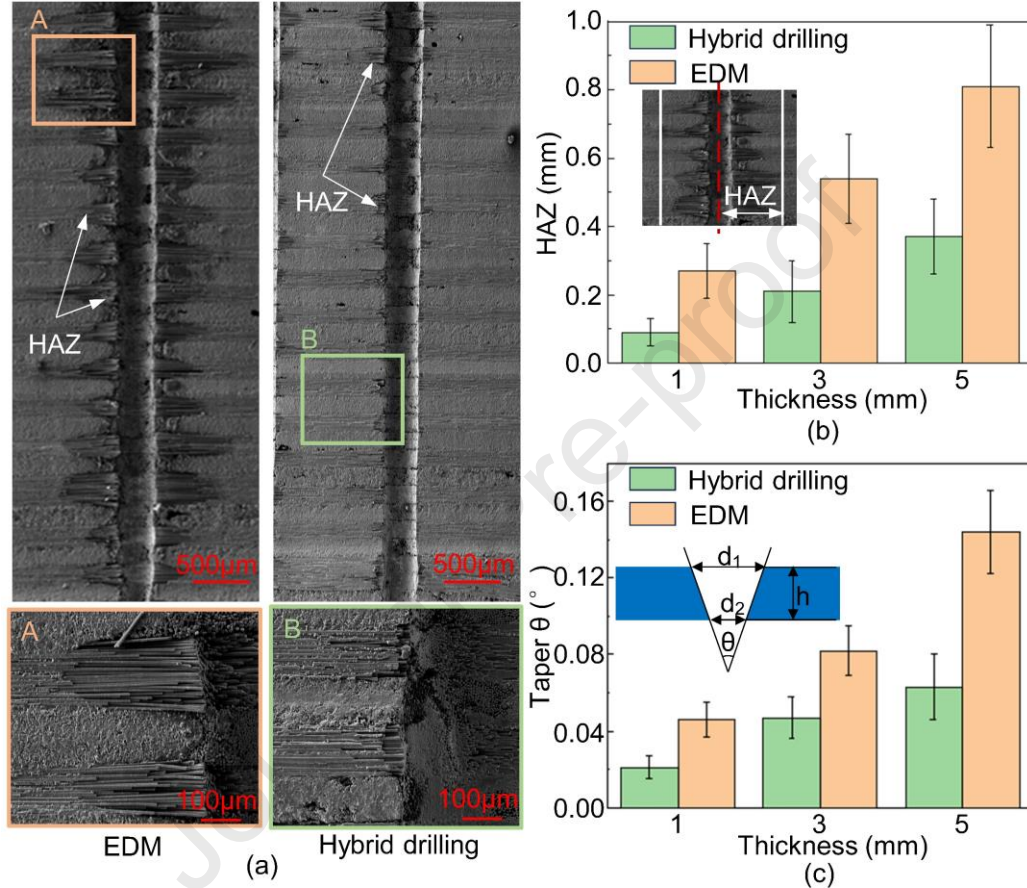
Effect of different machining methods on machining quality. (a) Profile of machined holes with different machining methods. (b) HAZ of machined holes. (c) Taper of machined holes. The error bars represent the maximum and minimum lengths of the taper for different machining methods.
